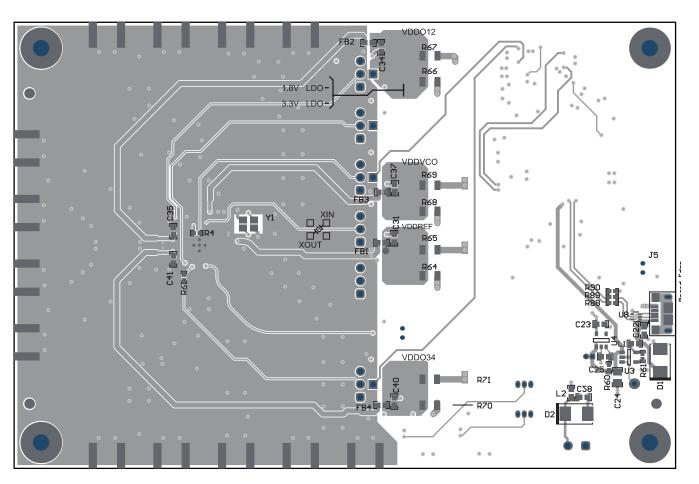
PCB Layer 4: Bottom Layer Composite
